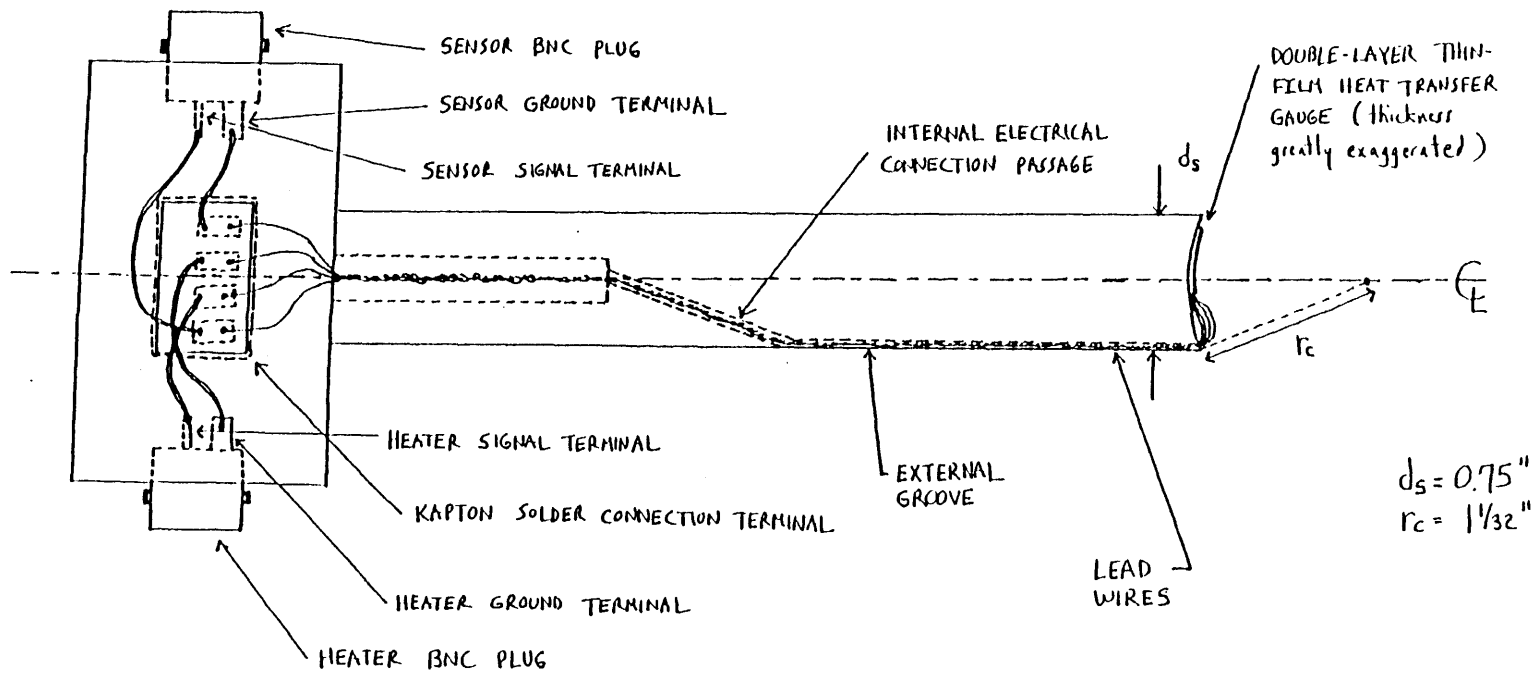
DOUBLE-LAYER SENSOR SHOCK TUBE PROBE SUPPORT
